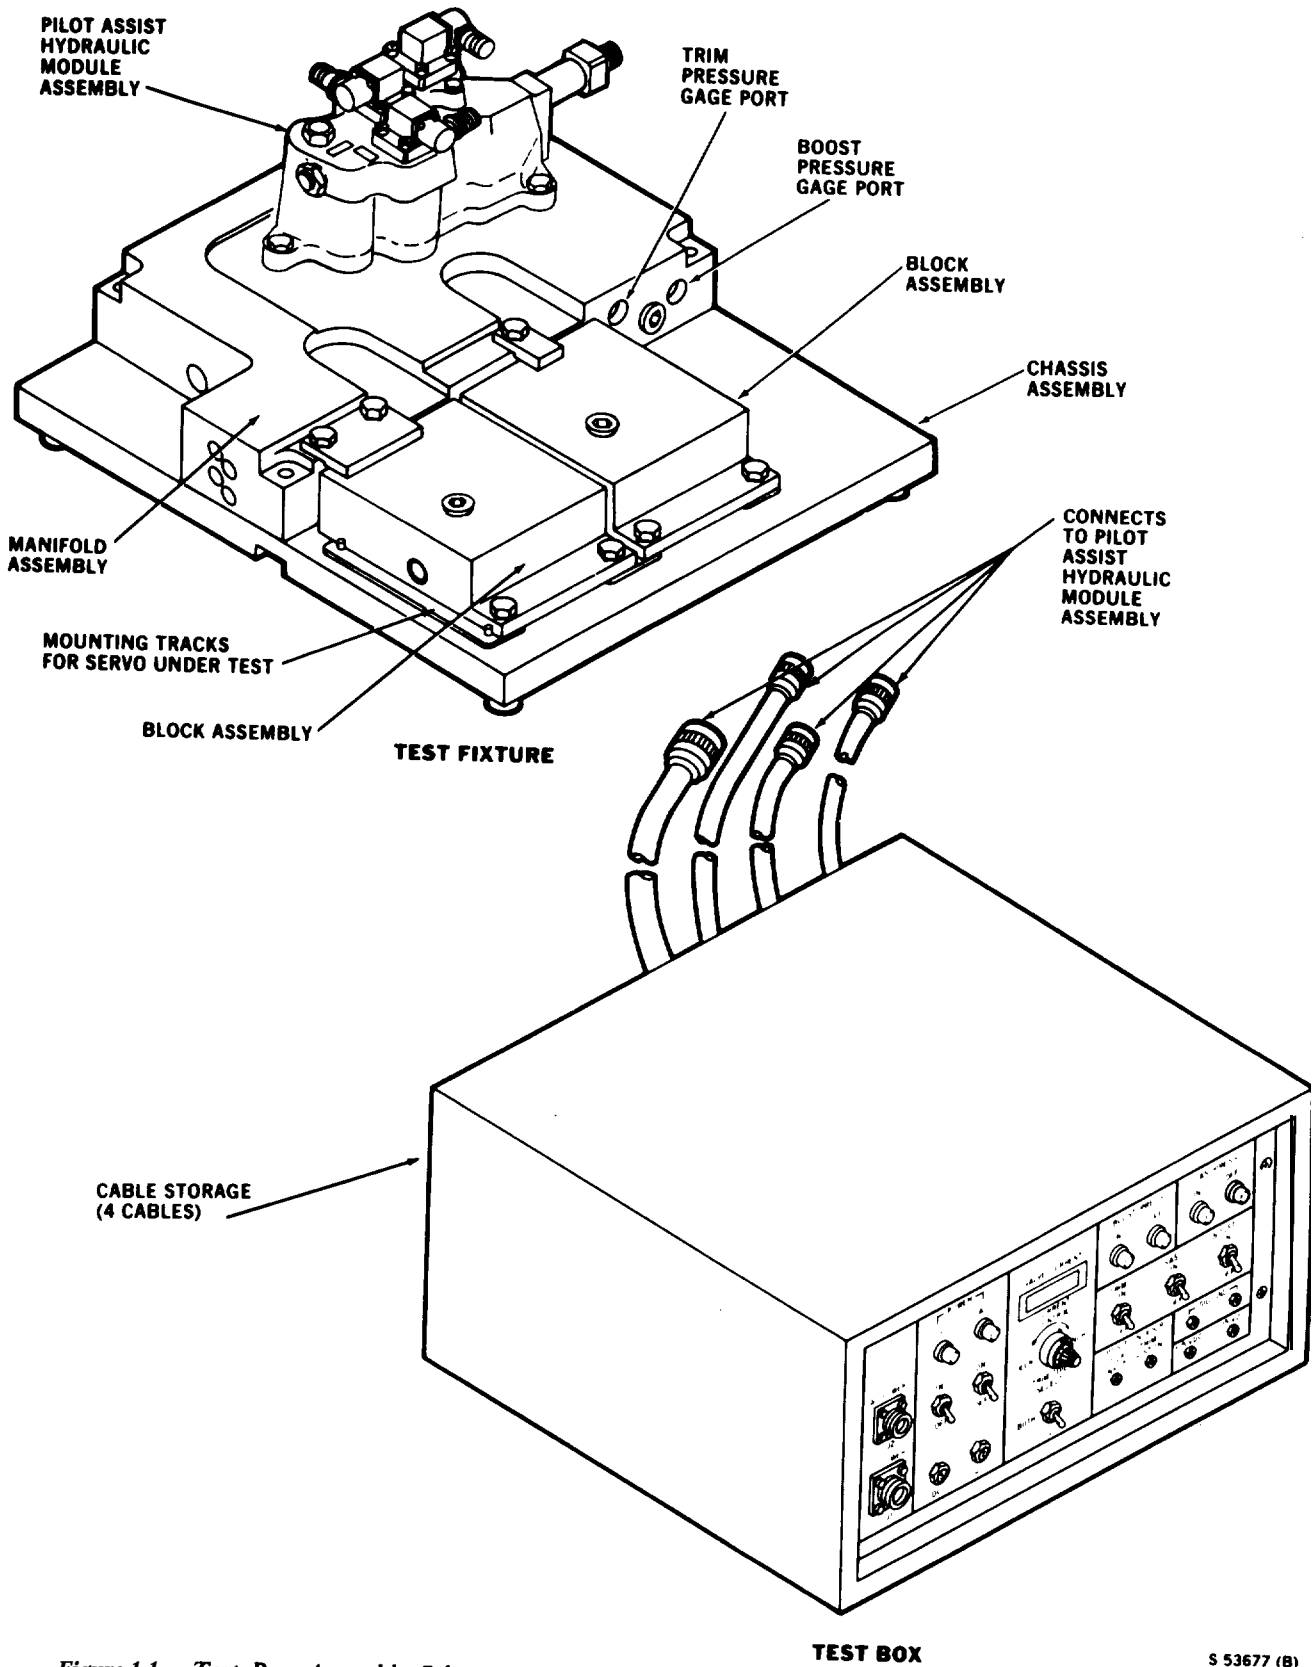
Test Box Assembly Pilot Assist/Nulling Fixture Assembly SAS Actuator, Major Components
